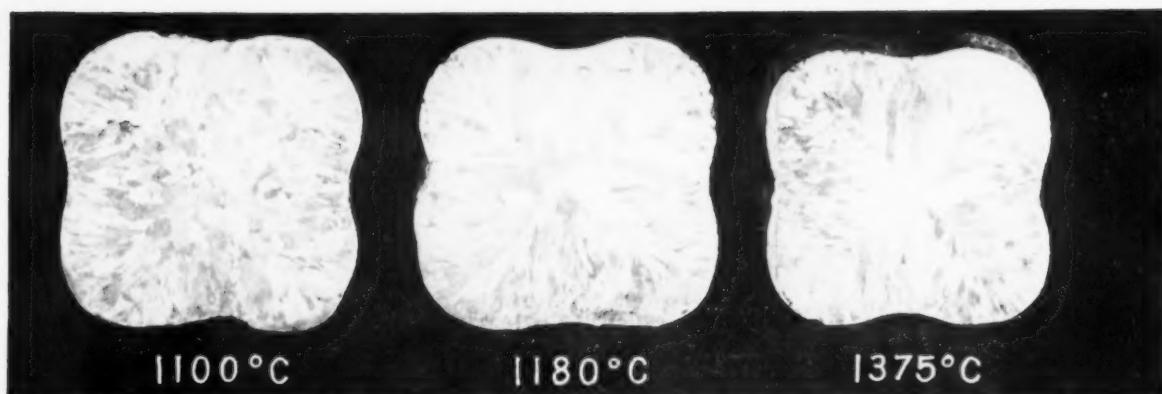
Lower ingot pouring temperatures produce the most favorable structures for hot forging; diagonal
